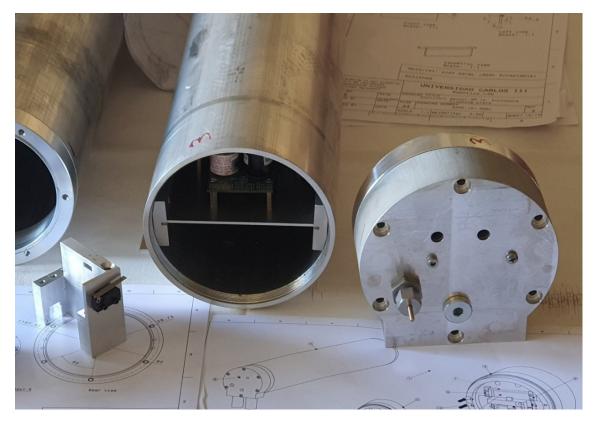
Front View – Cover Removed, Mounting Tray Installed
